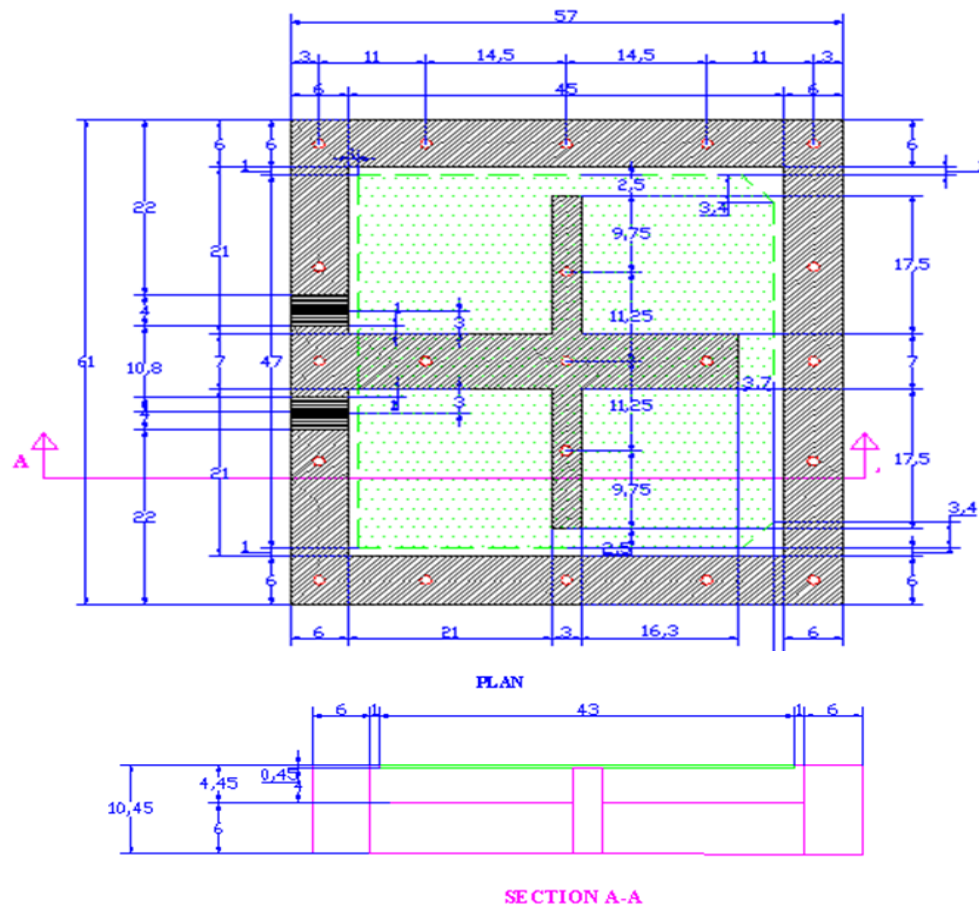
Dimensions (mm) of the 4-pole cavity resonator
